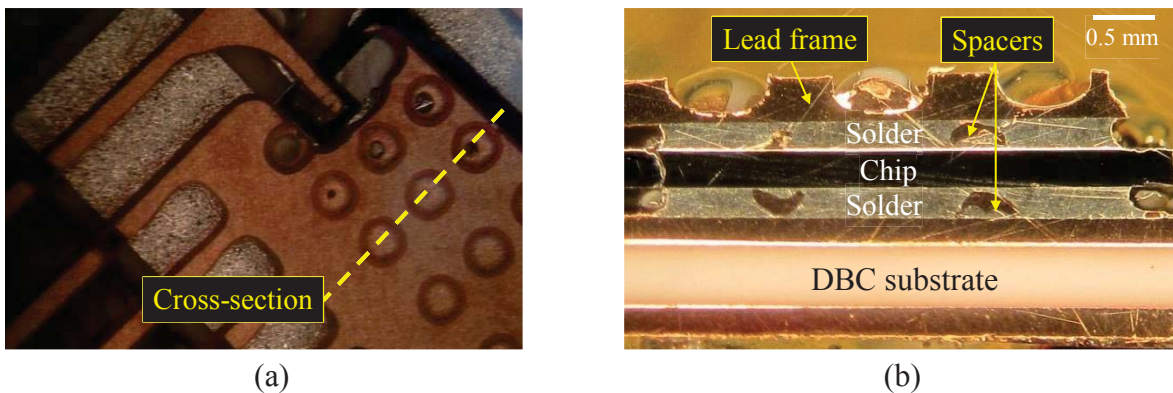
Cross-section of the packaged module in Figure 2-25.
